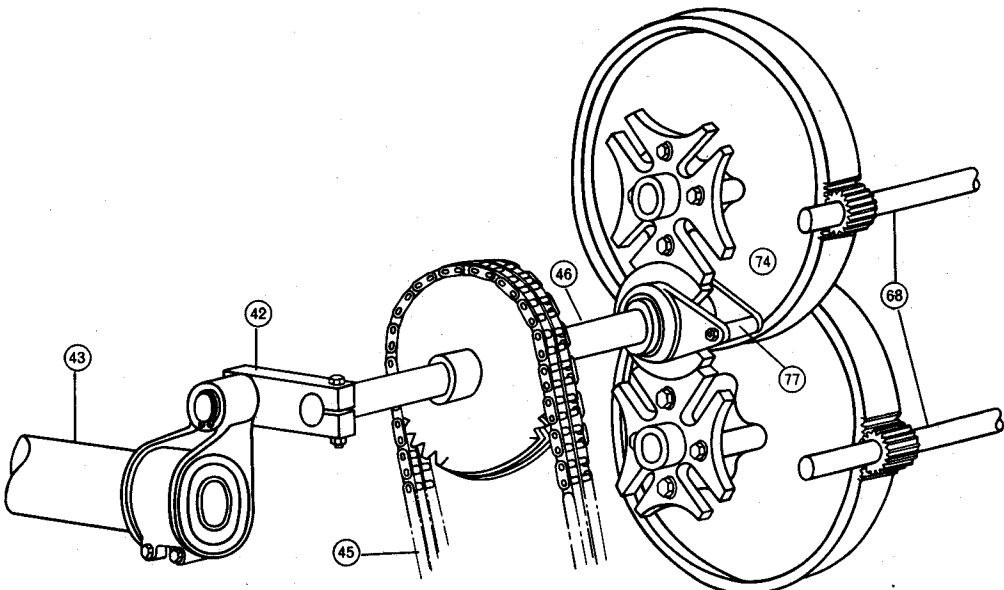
Schematic drawing of Type HR Geneva mechanism and drive
